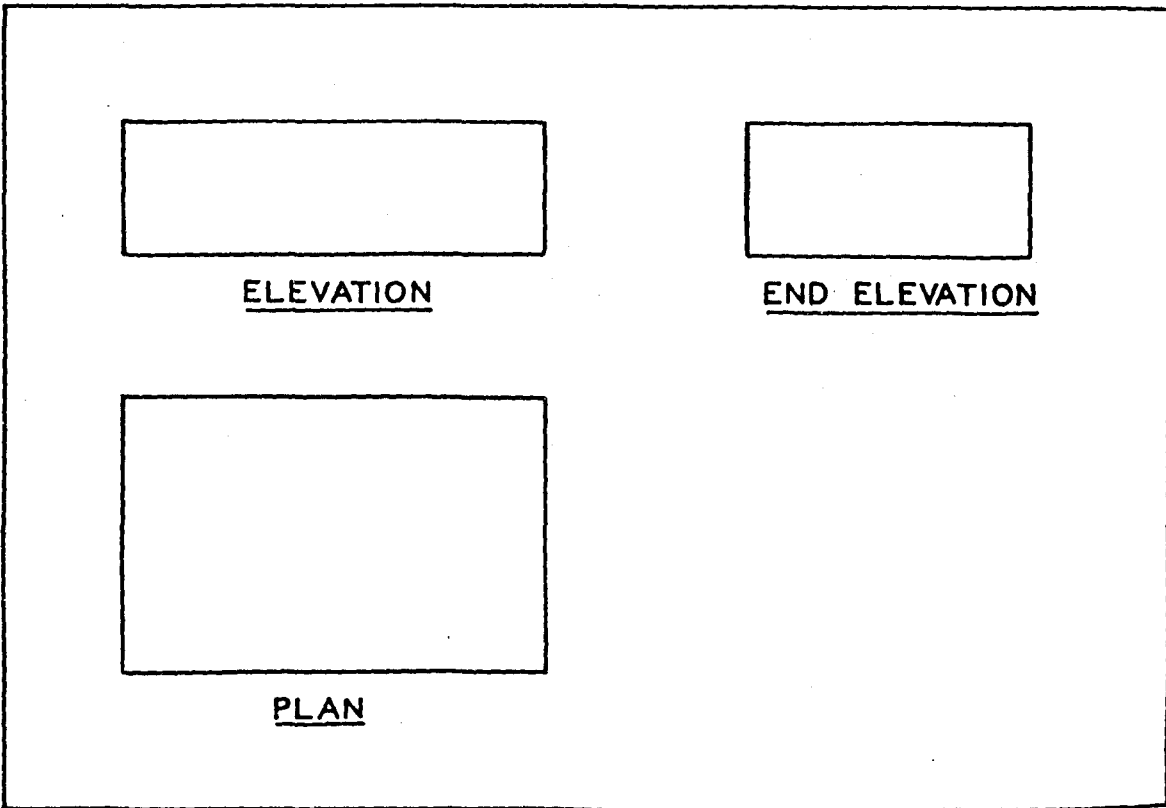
FULL SIZE DRAWING OF A MATCH BOX
